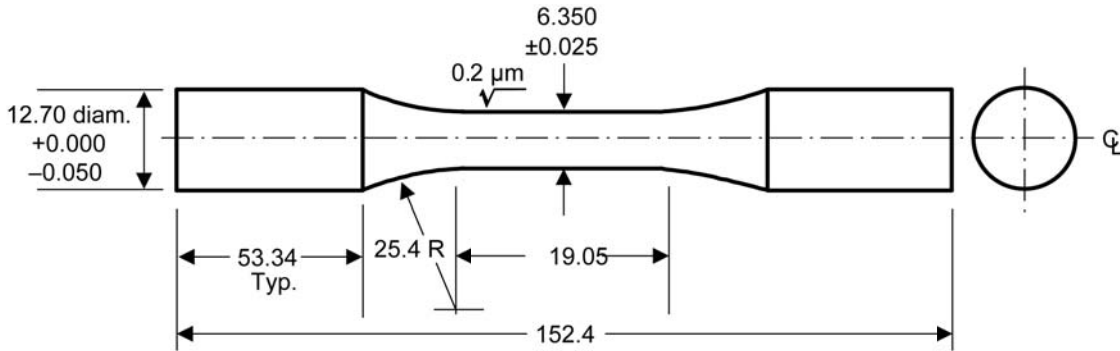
Ti-6Al-4V test sample design (dimensions in millimeters).
